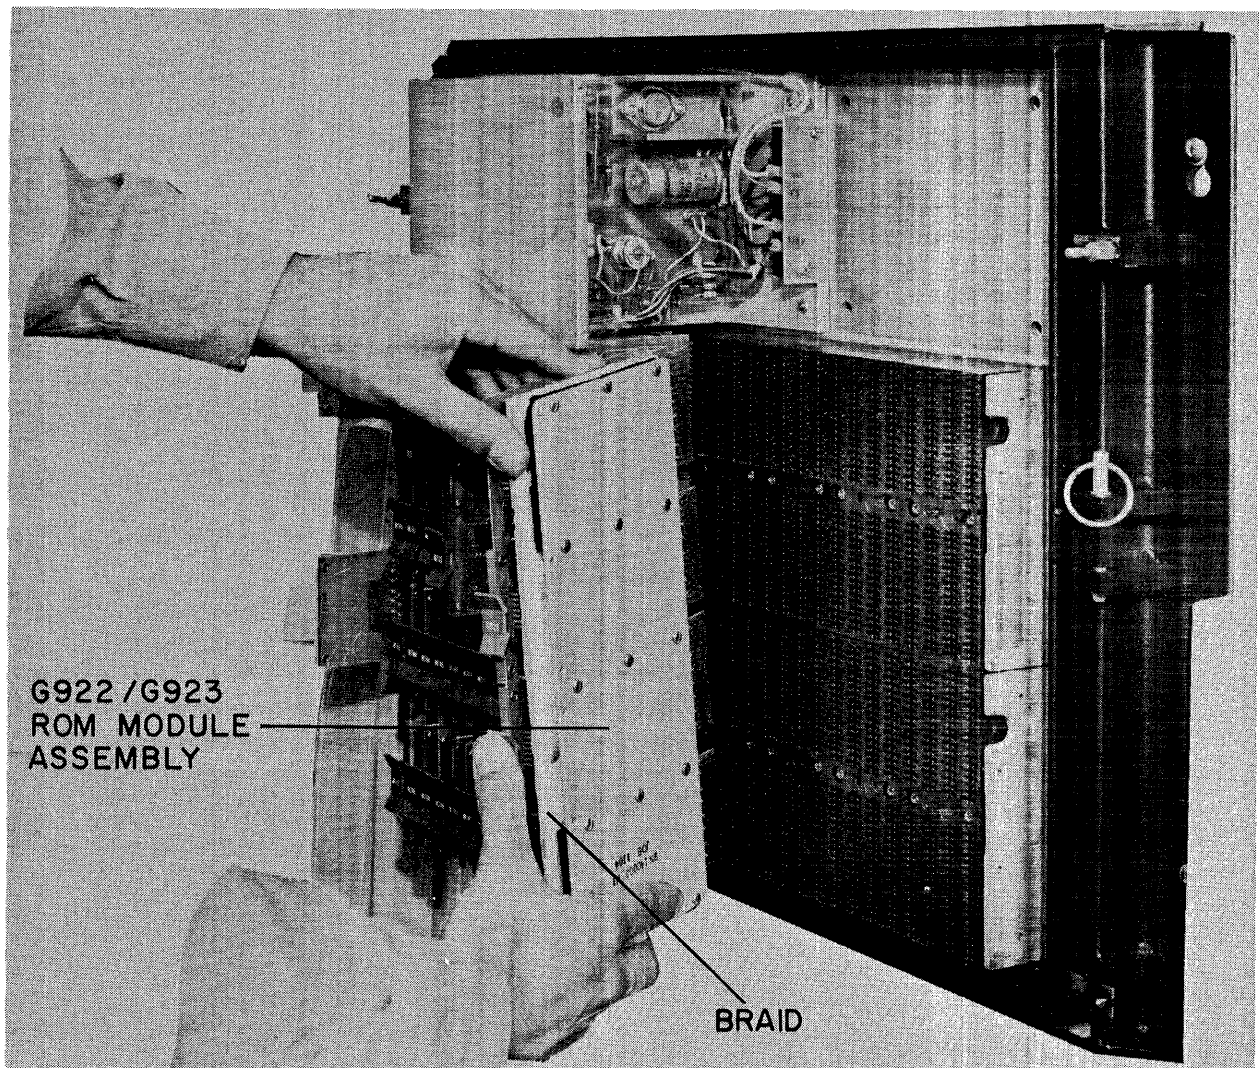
Installing G922/G923 ROM Modules Assembly
